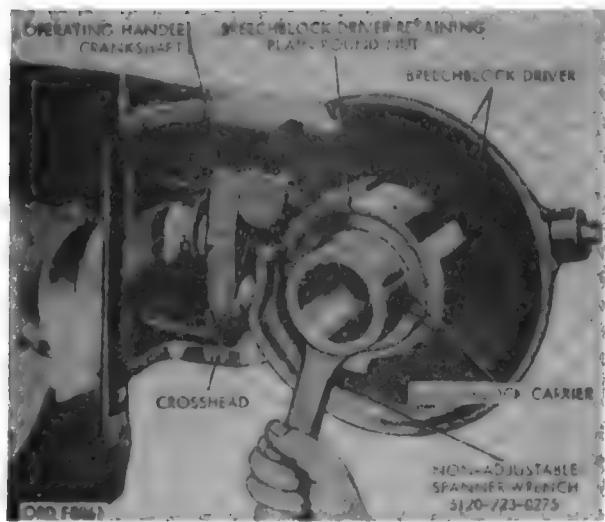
Removing or installing breechblock driver retaining plain round nut.
